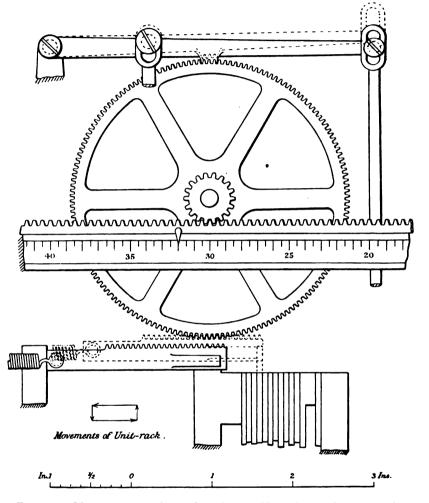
Monotype composing and casting machine; keyboard unit-counting mechanism.
